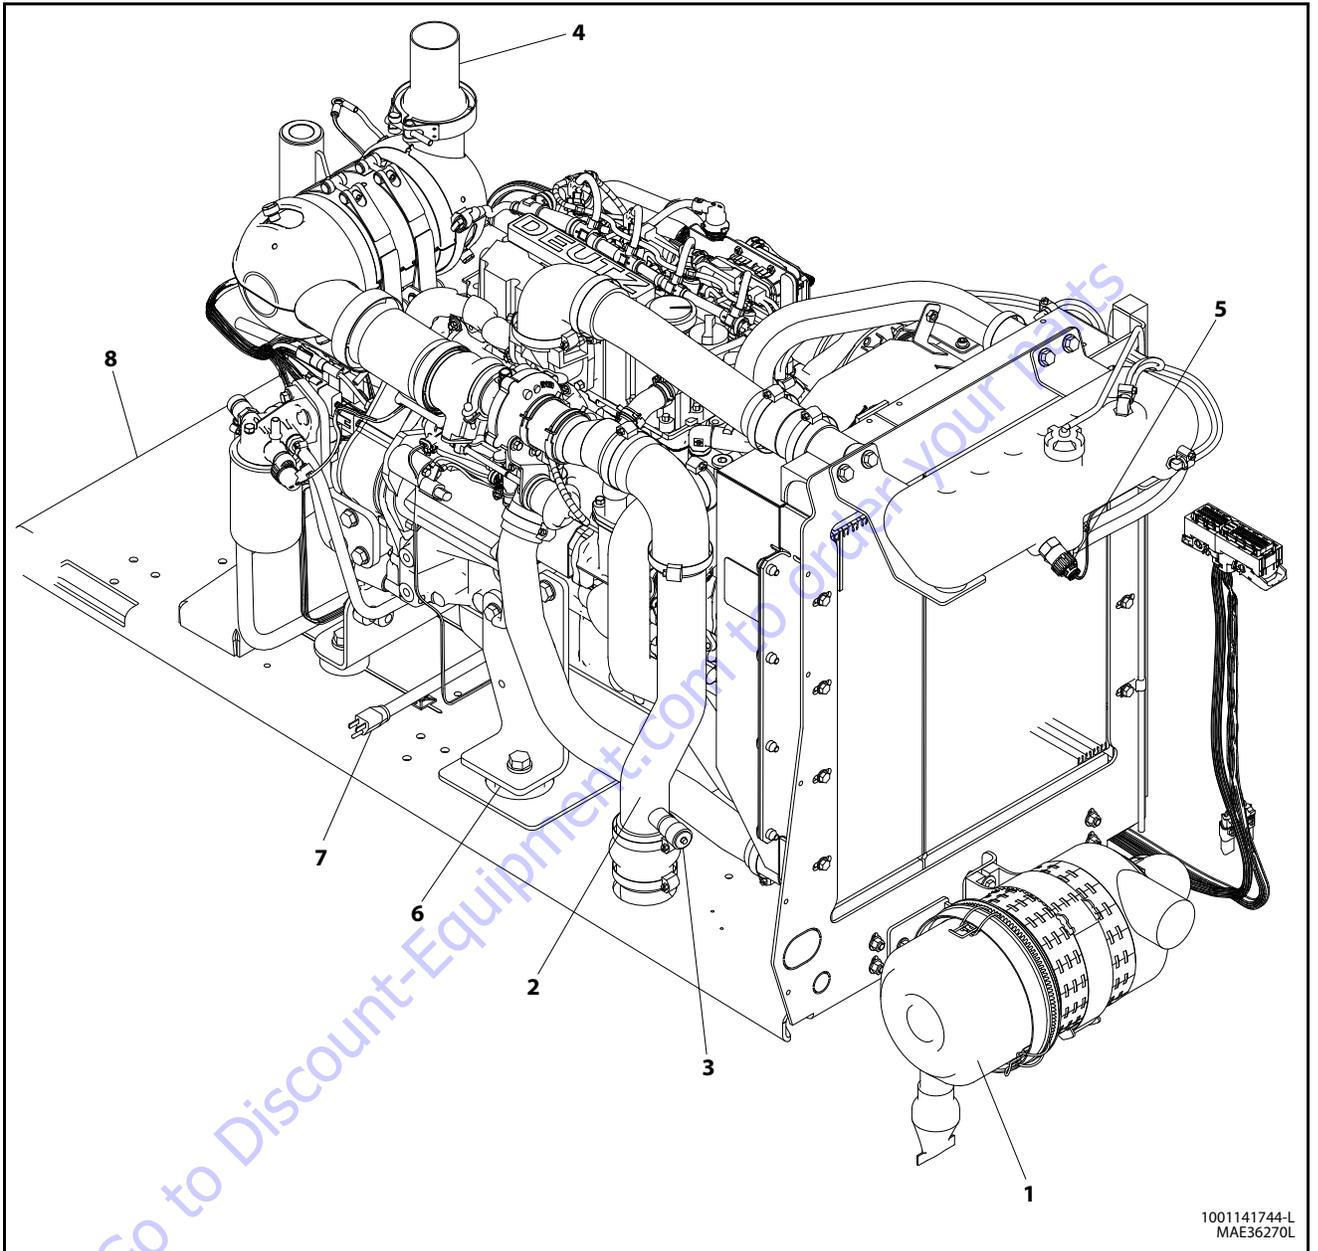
Detuz 2.9 L4 (GUO III) Engine Installation - Sheet 2 of 2
